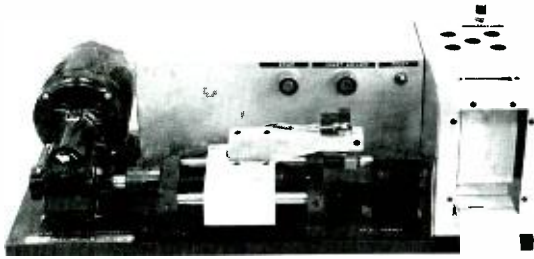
Profilometer measures molded pressure rollers shown in drawing at rear.
